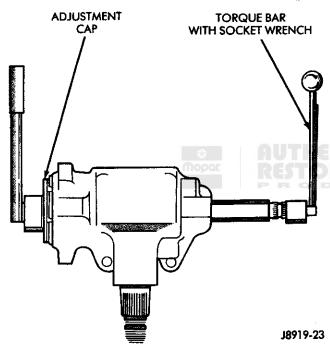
Wormshaft Bearing "Preload" Torque Adjustment
